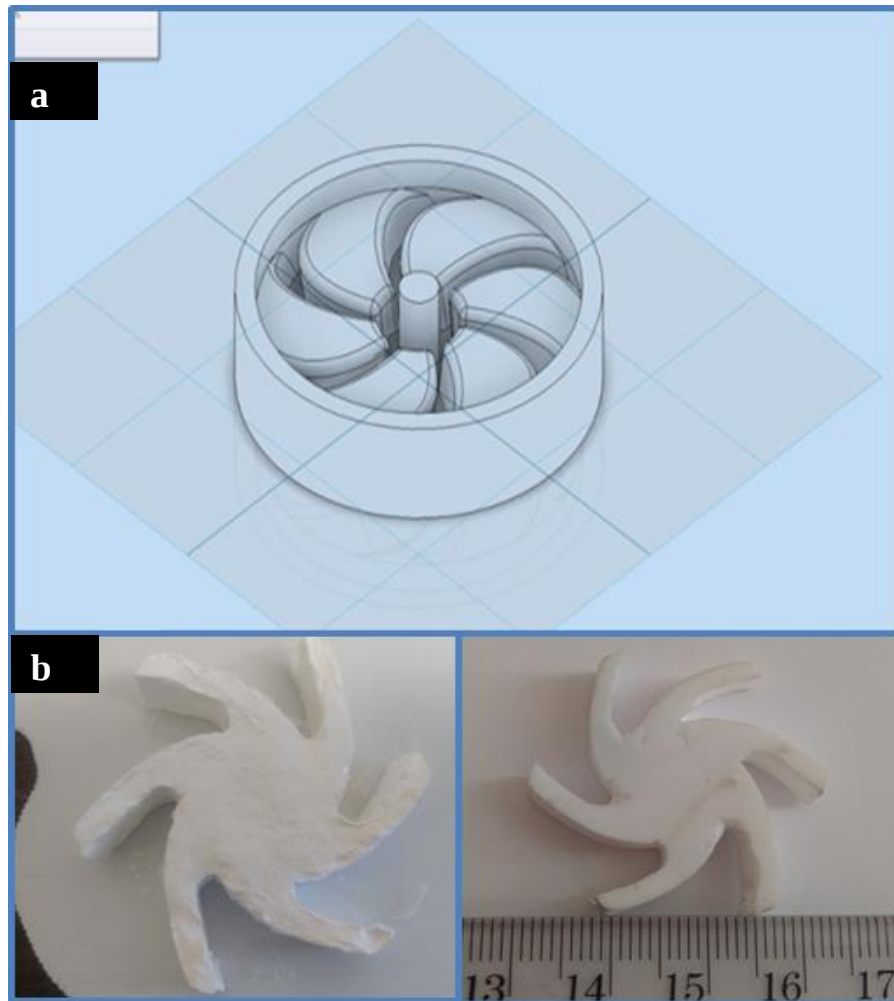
Illustration of the tooling method showing the CAD file of the ABS 3D printed mould and the product of the mould design.
